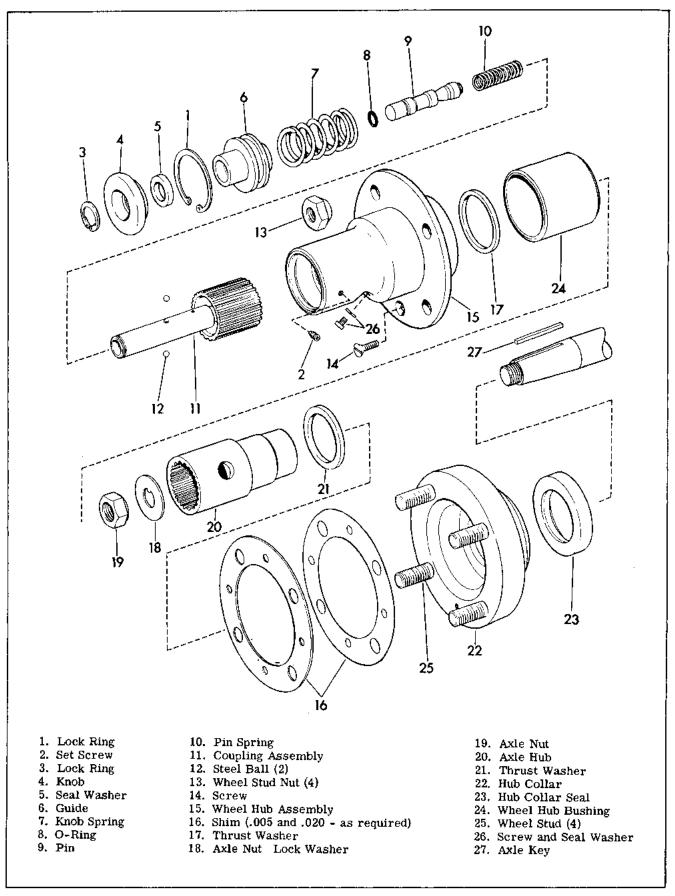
B-10B. Lockout Hub (1963 to early 1977) - exploded view
